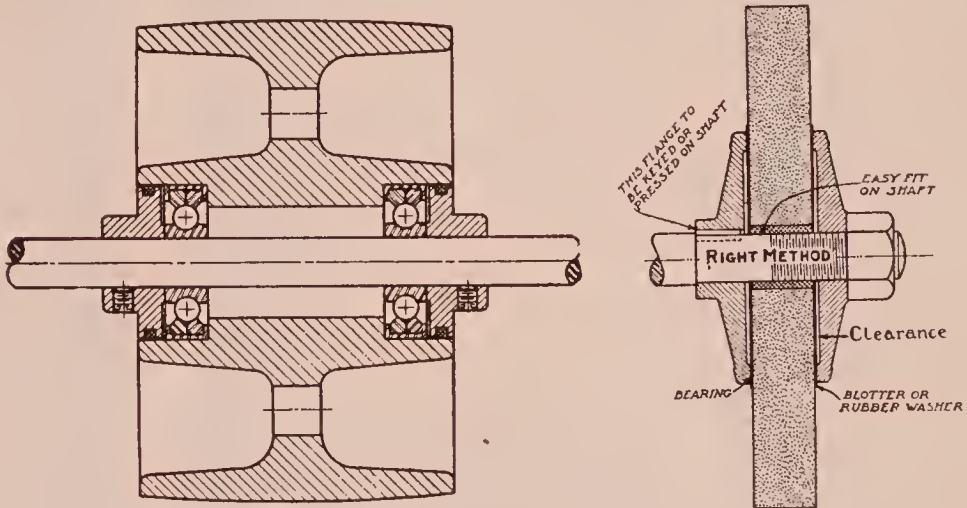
Full sectional views of a ball-bearing loose pulley and an emery wheel.
